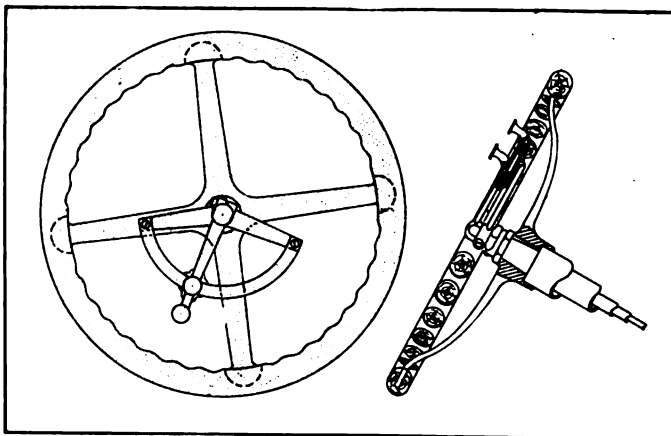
Steering wheel, showing mounting of spark and throttle quadrant and cross-section
